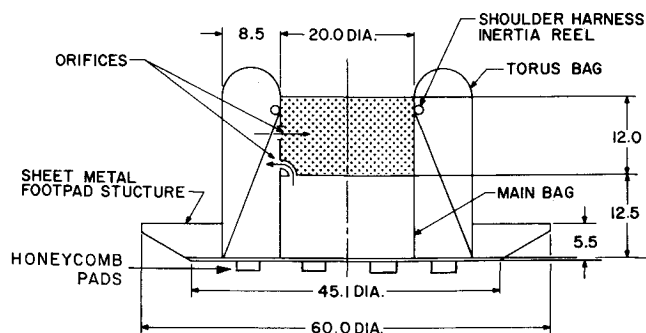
Hybrid lander test model geometry; dimensions in inches.
